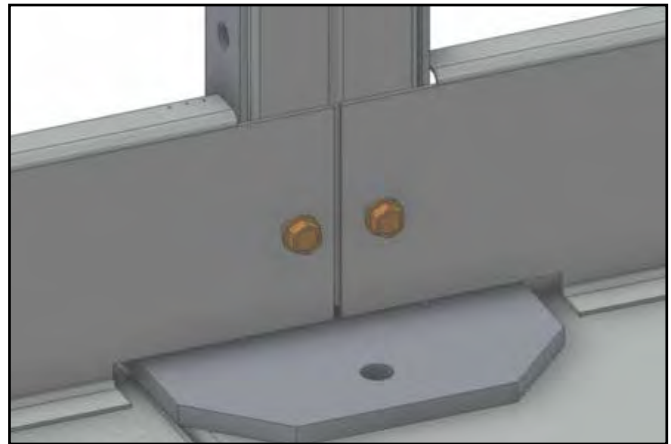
Top Perimeter Guardrail Toe Board Attachment
